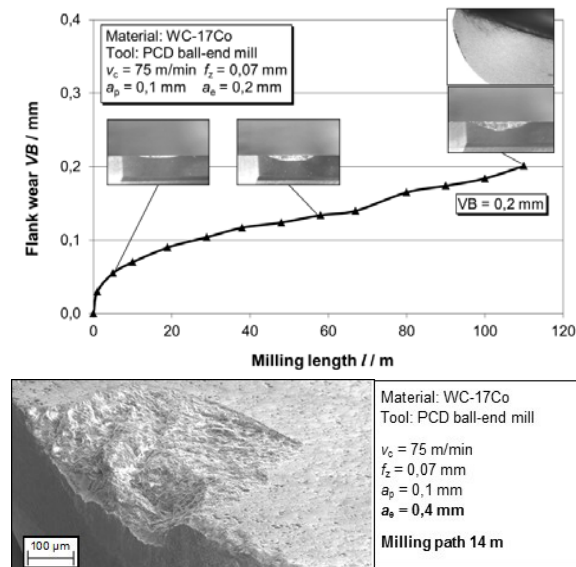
Tool wear in milling of a hardmetal coating with PCD tool
